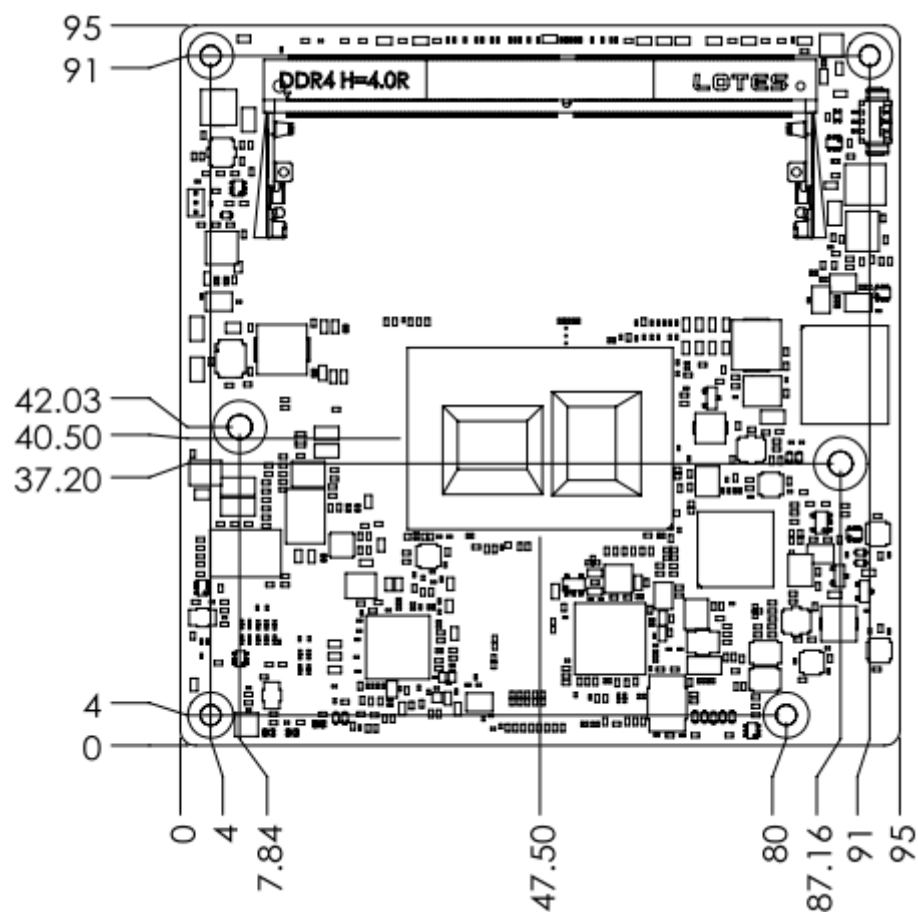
Pentium Series Board Mechanical Diagram – Front
